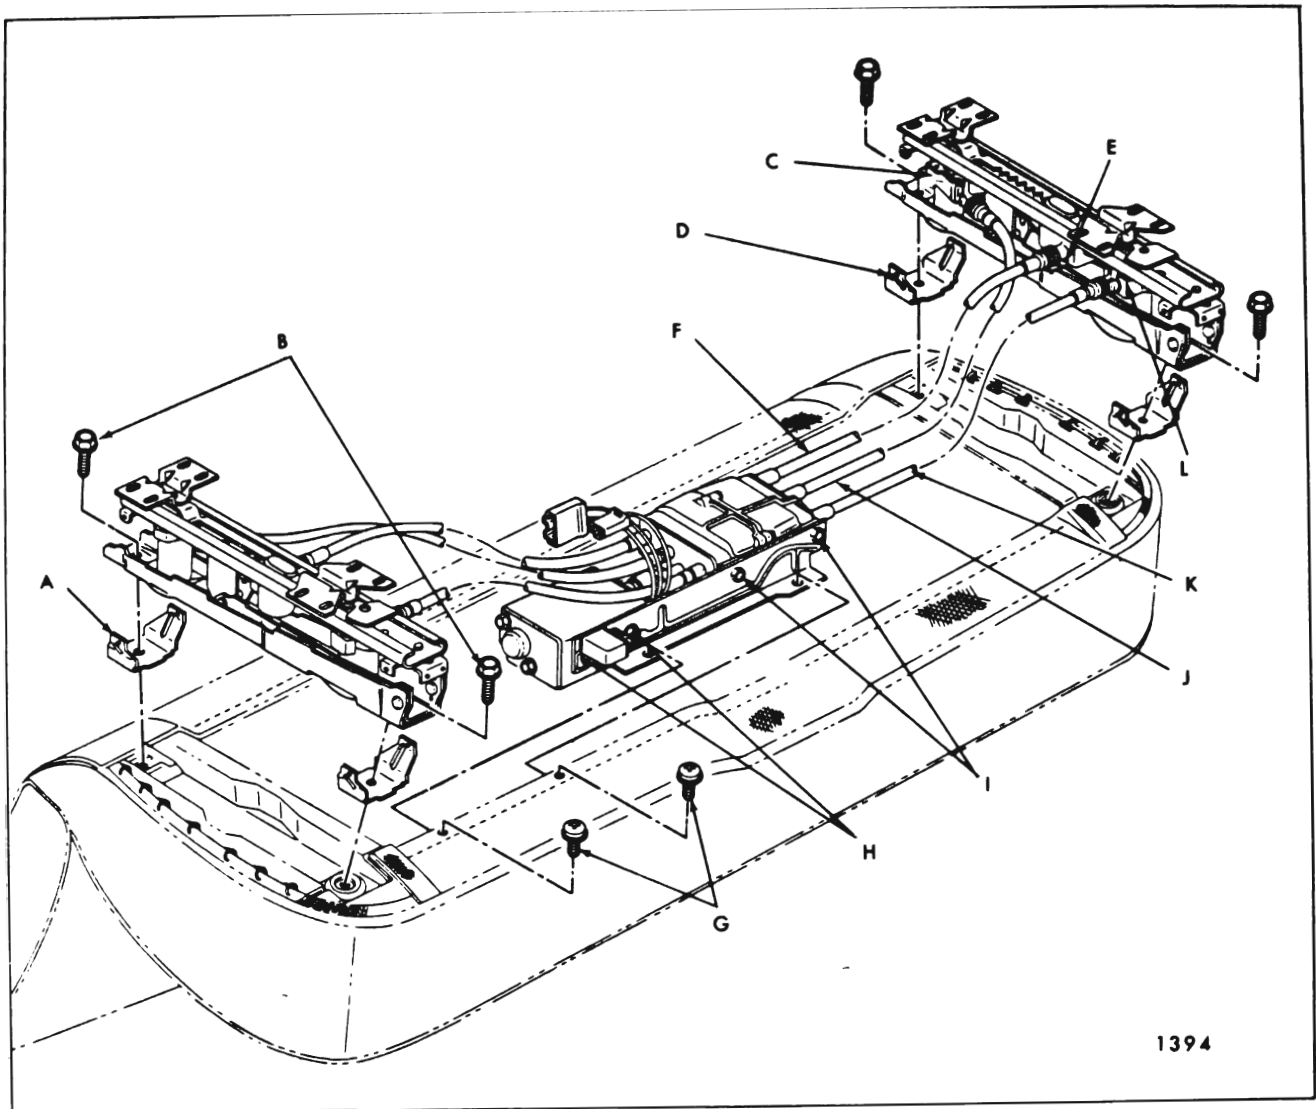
Front Seat Assembly - Six-Way - "B & C" Styles
